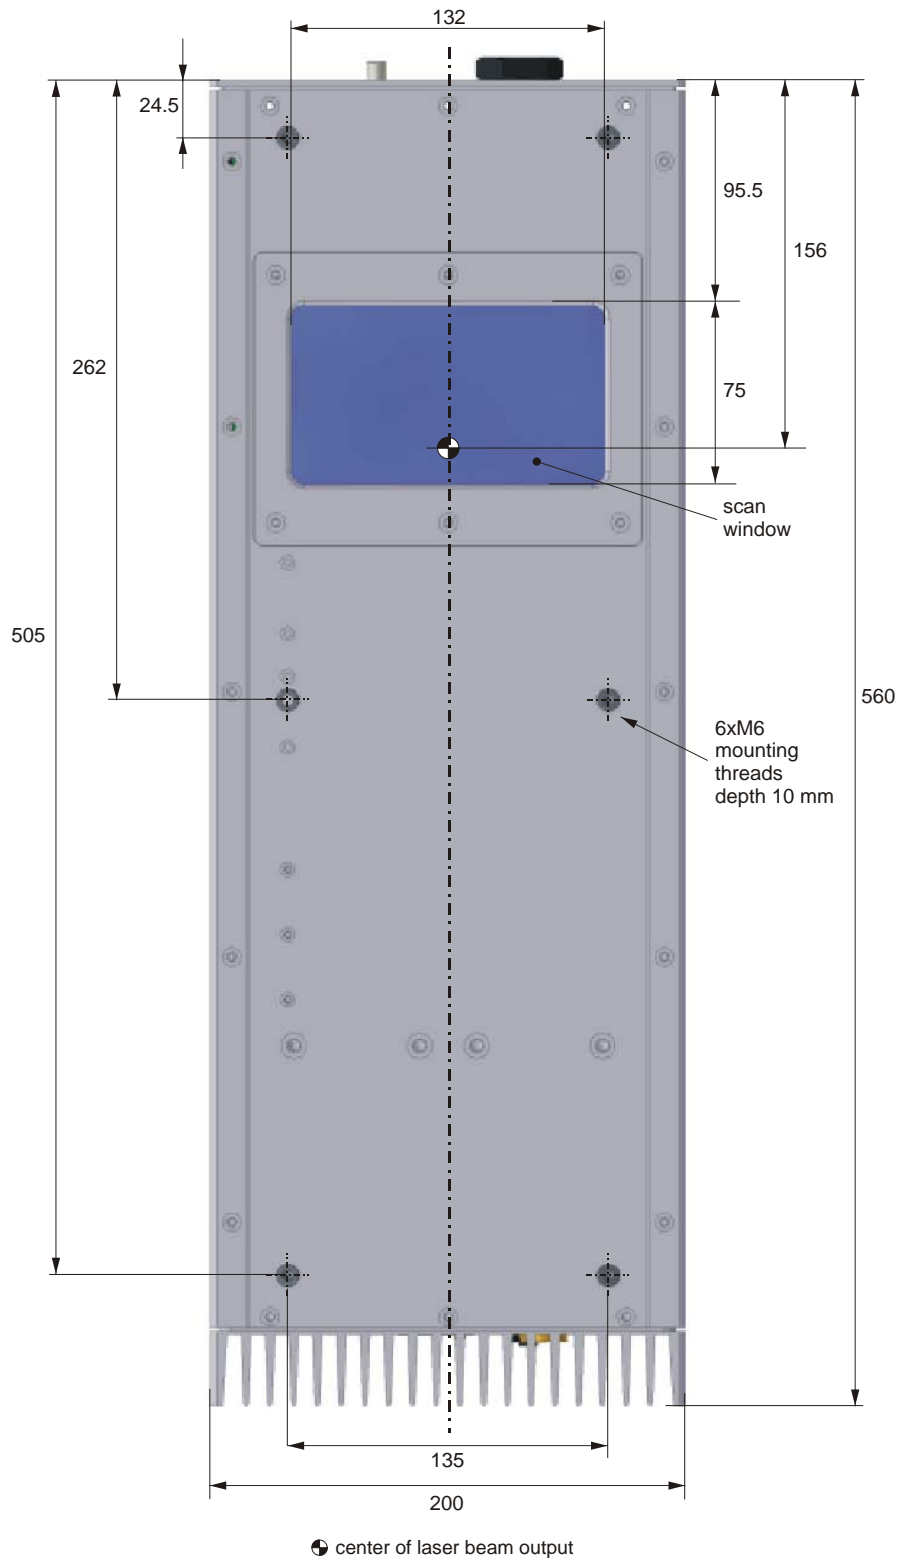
Bottom view of LMS-Q280i (base plate side)
